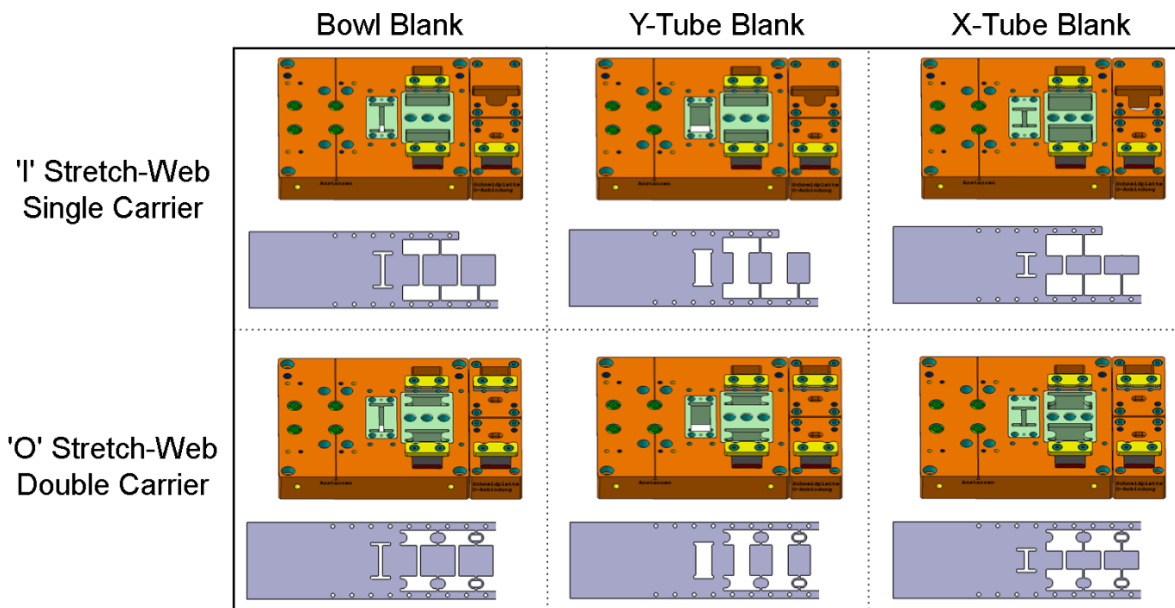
Strip layouts and blanking station insert modules for different strip layout configurations [123].
